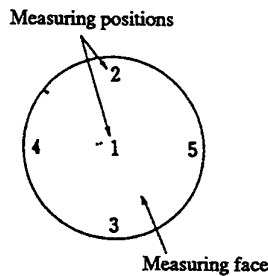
Checking the parallelism between measuring faces with a gauge block
